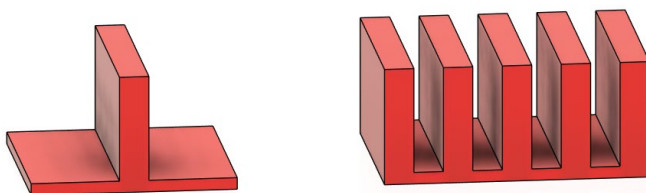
CAD models prepared for test printing in the Autodesk Fusion 360 program.
